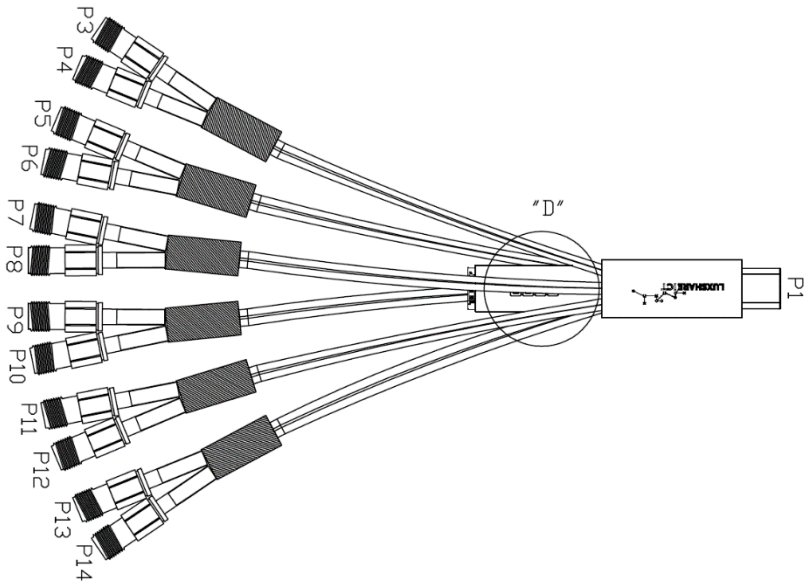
USB Type-C Plug Alt mode Fixture TF21-190G
